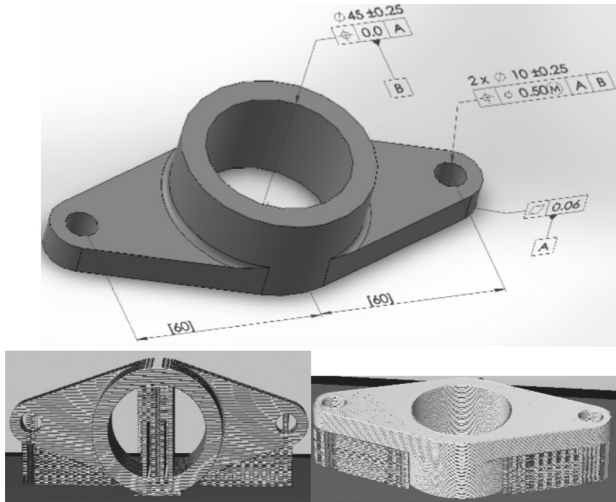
(a) A simple part with GD&T and (b) support structures when the part is built along different build directions
